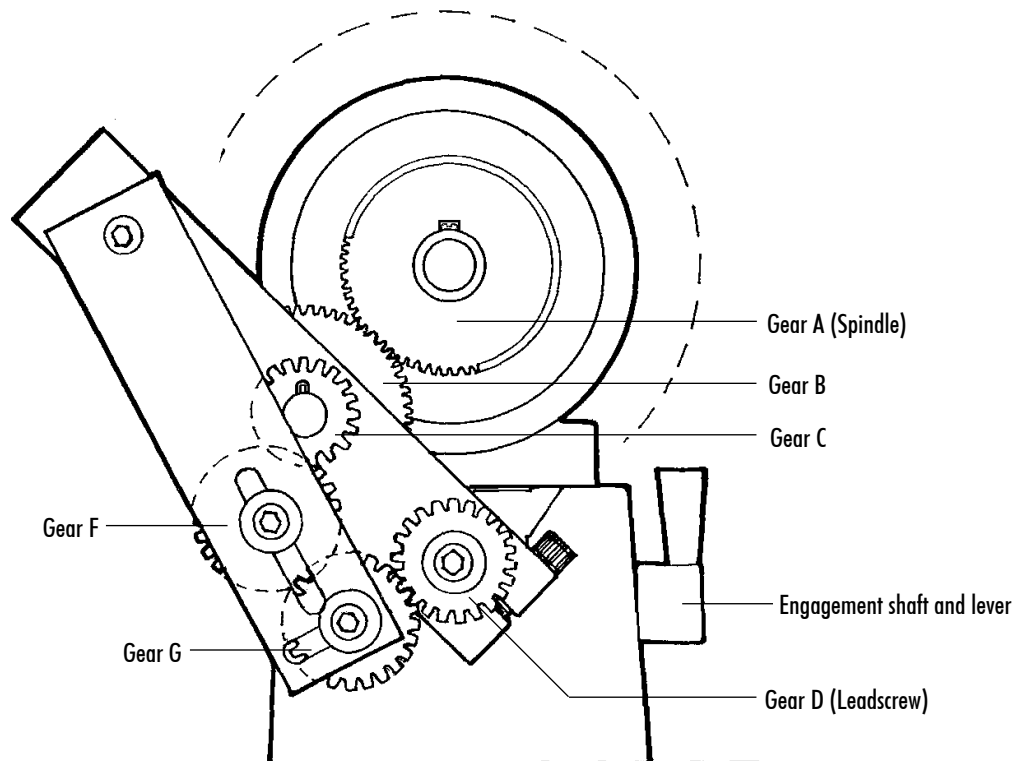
Gears A, B, C, D, F and G installed for cutting a left-hand thread
